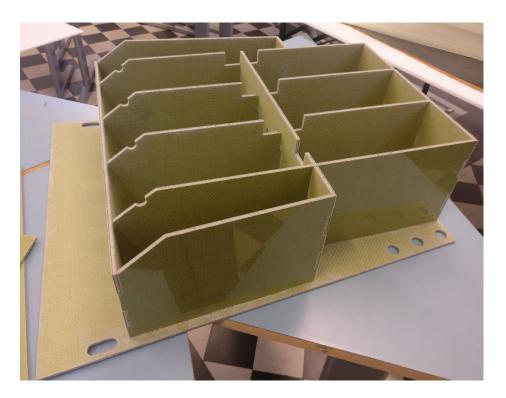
Test fitting the composite parts before final assembly with epoxy.
